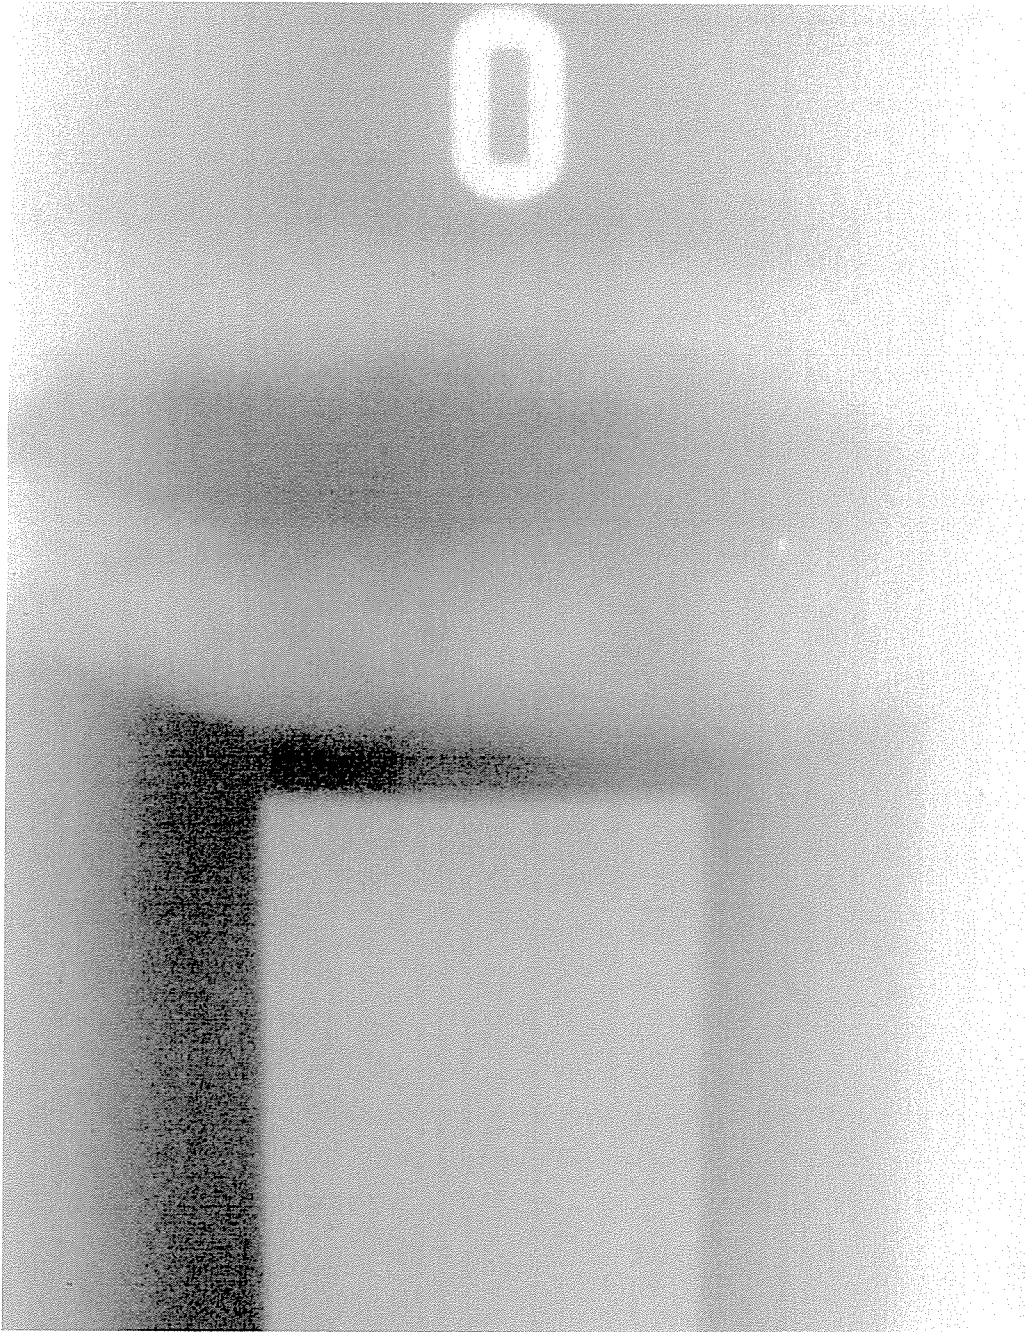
Tungsten inclusion (double wall double view ellipse technique). (Courtesy Charles J. Hellier.)
